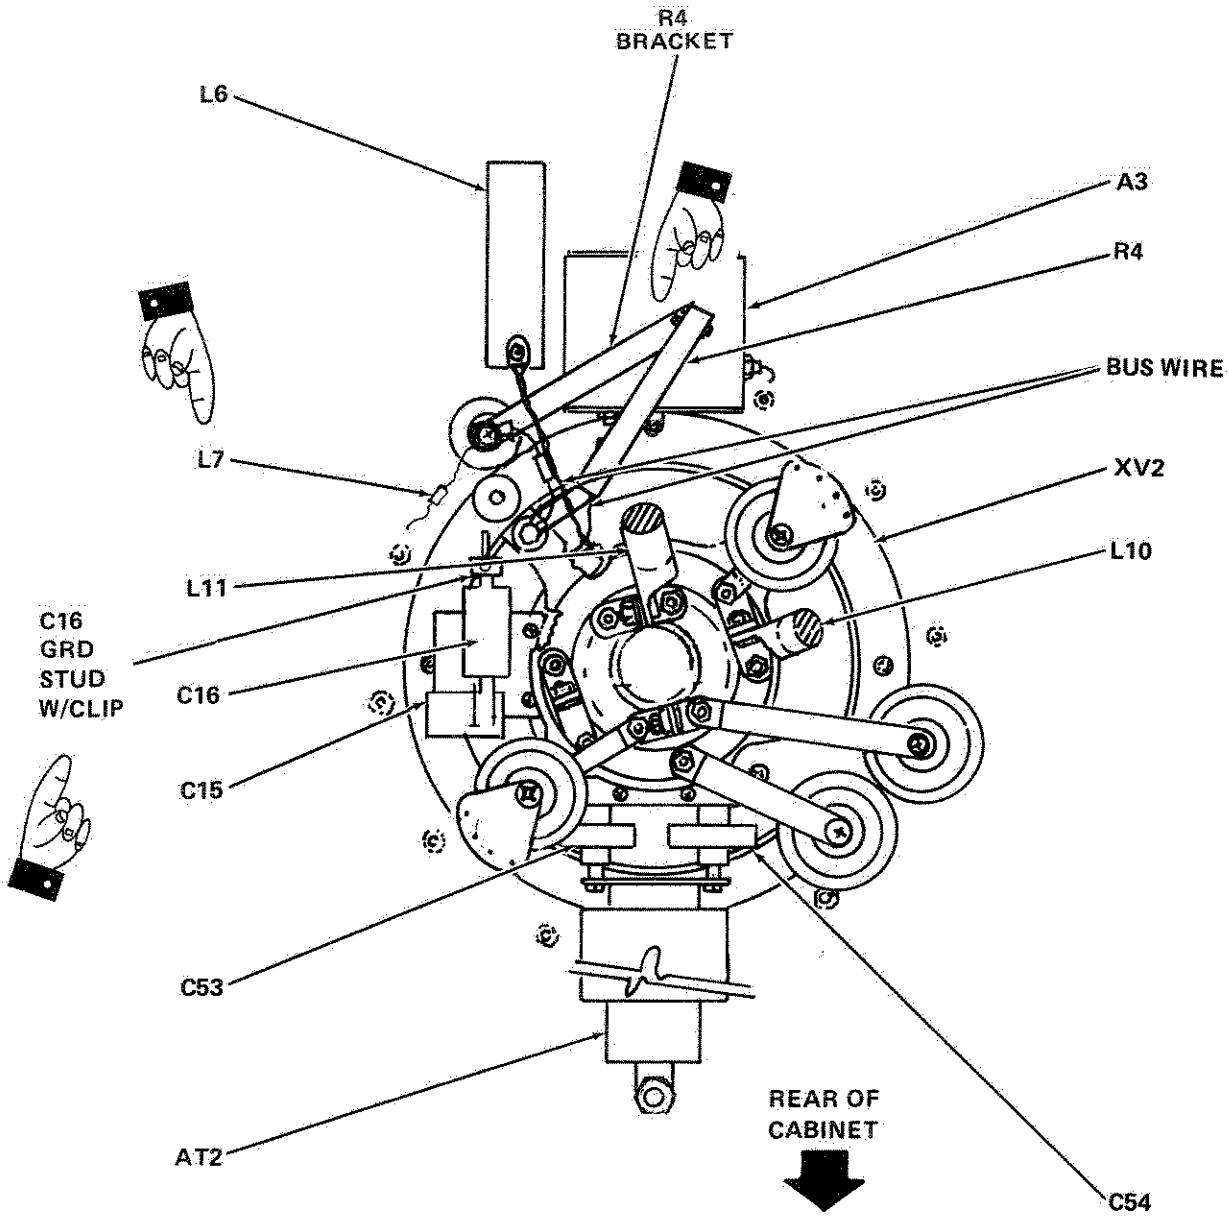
Driver Tube Socket 1XV2, Bottom View
